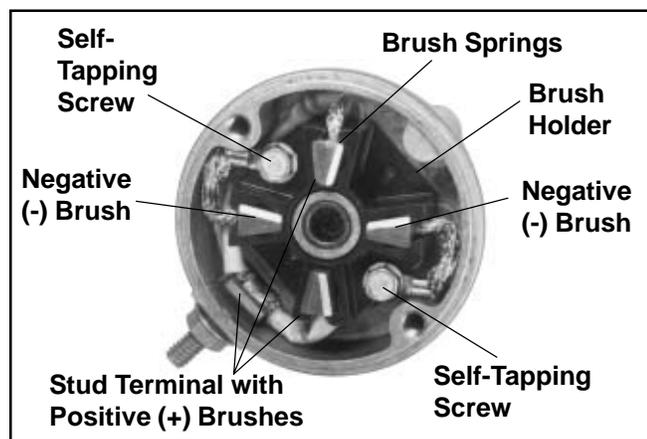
Style "A" Commutator End Cap with Brushes.
